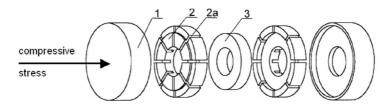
Device for application of the uniform compressive stress to the ring-shaped sensing element [4]: 1 — base backings, 2 — nonmagnetic cylindrical backings, 2a — grooves or the winding, 3 — core under investigation.
